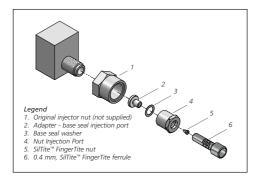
Exploded diagram of the SilTite  $^{\text{\tiny TM}}$  FingerTite Injection Port assembly
